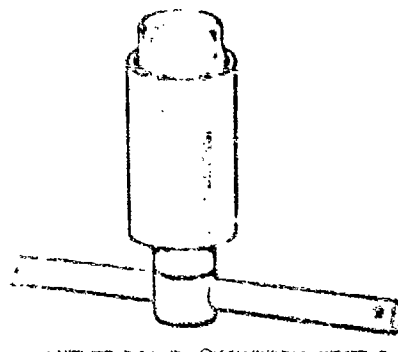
Puller for the reverse gear block shaft (model 2469)
